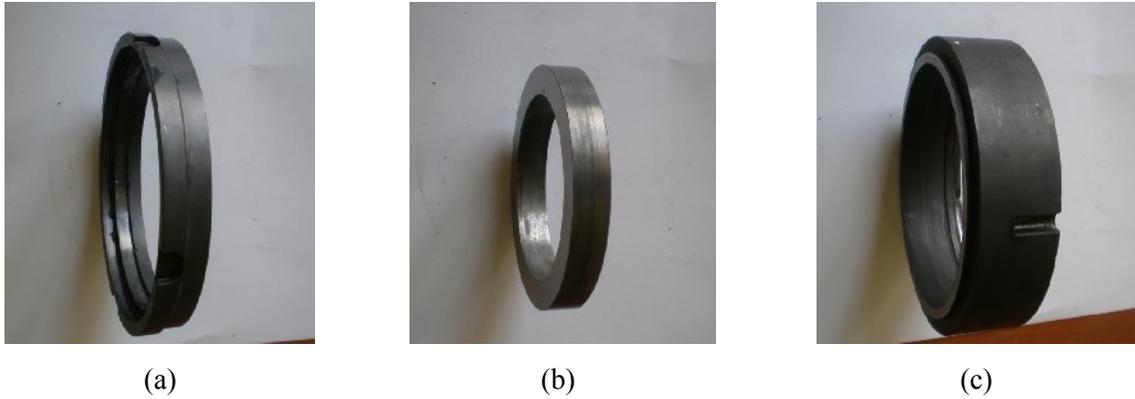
Surface condition of the mech. seal after corrosion test was conducted:
